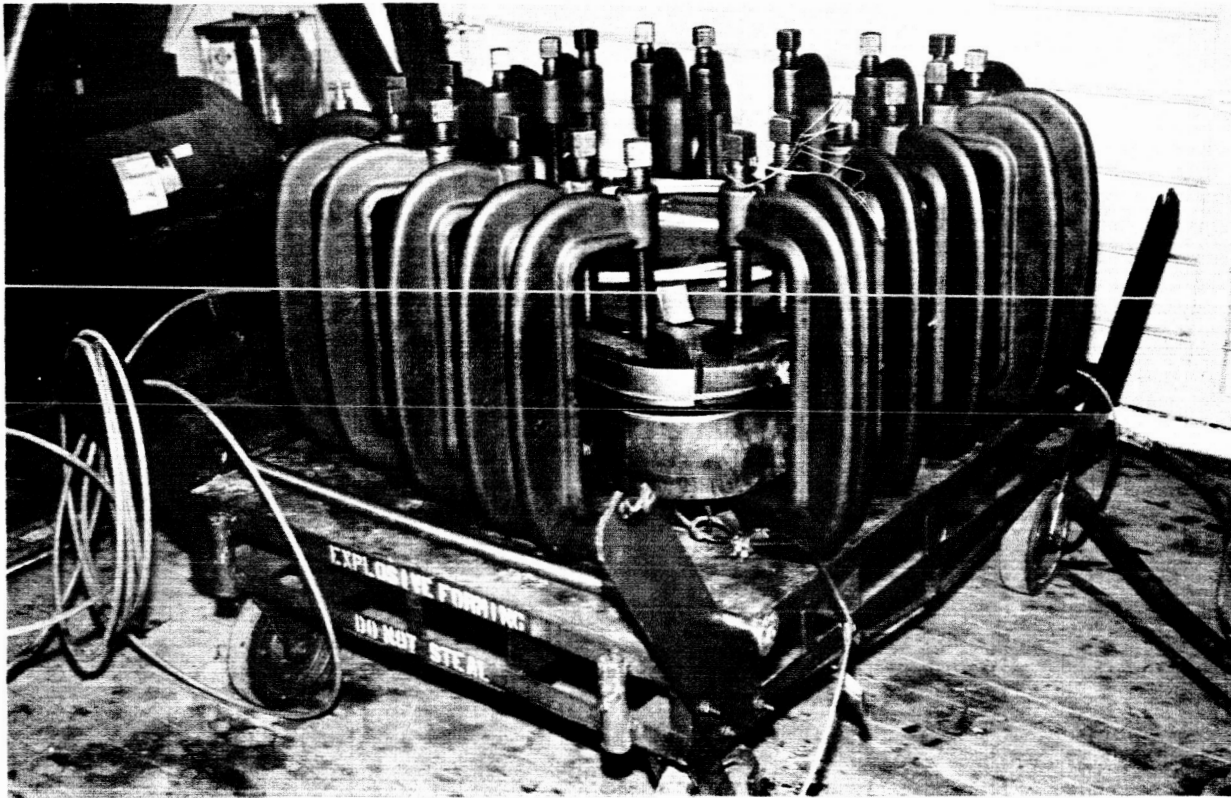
Ring Charge Placement for Explosive Forming of Aluminum Plate
